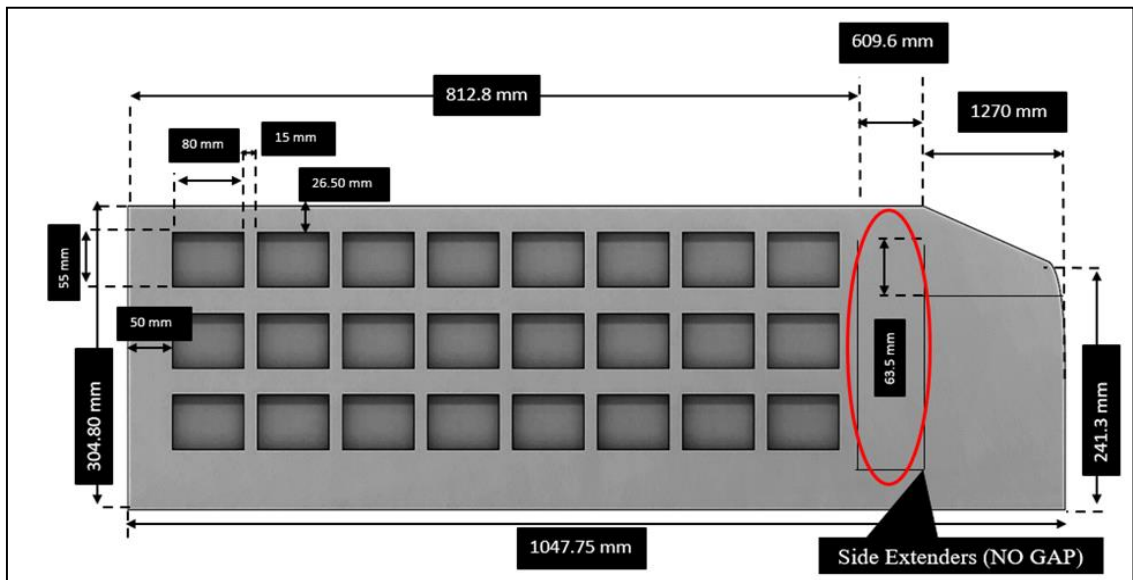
Dumper Truck with Optimized Grooves, Front Fairing and Side Extenders
